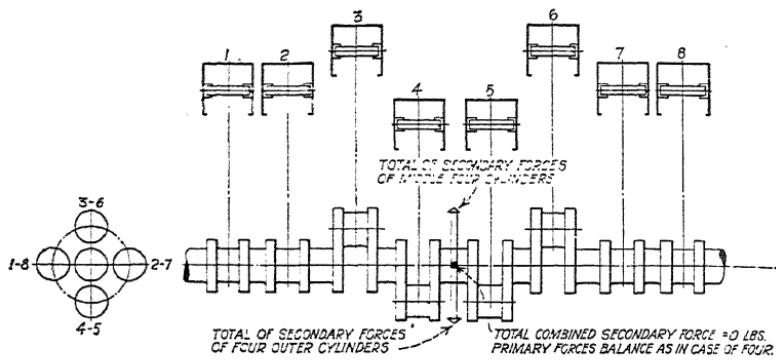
A 2-4-2 Shaft for an Eight-in-Line Engine
